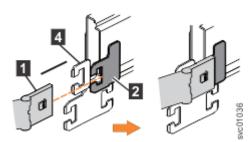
Install the inner connector of the upper CMA to the inner member of the support rail
